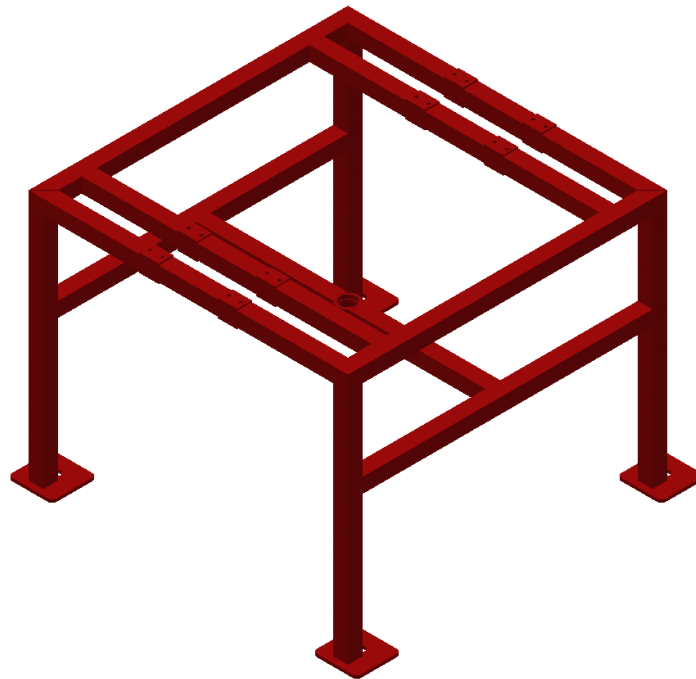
CAD representation of the main steel frame to which all separate sub-assemblies are fixed
